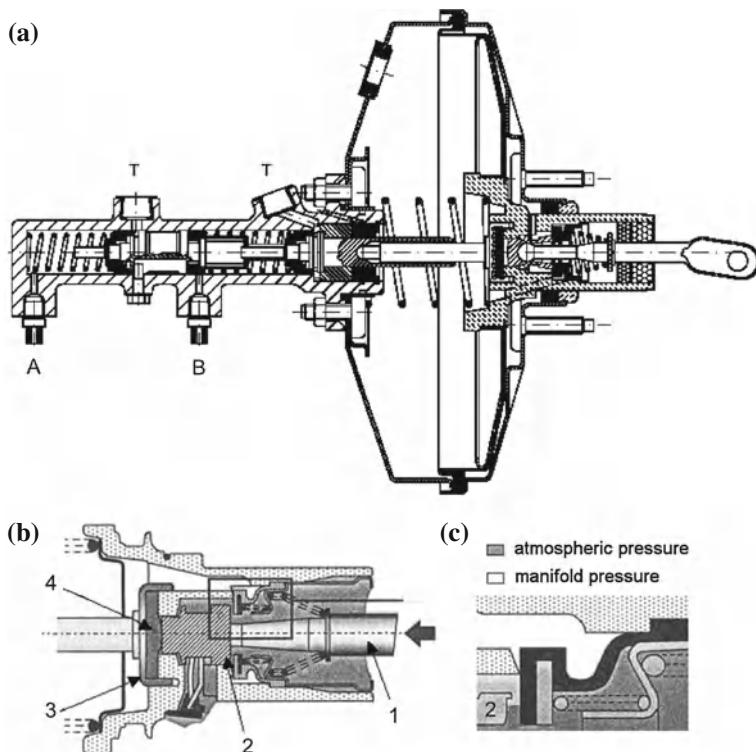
a Cross section of the brake pump and booster. b and c Enlarged detail of the valve between the vacuum chamber and the ambient air, used to modulate the power assistance (from Genta and Morello 2009)
